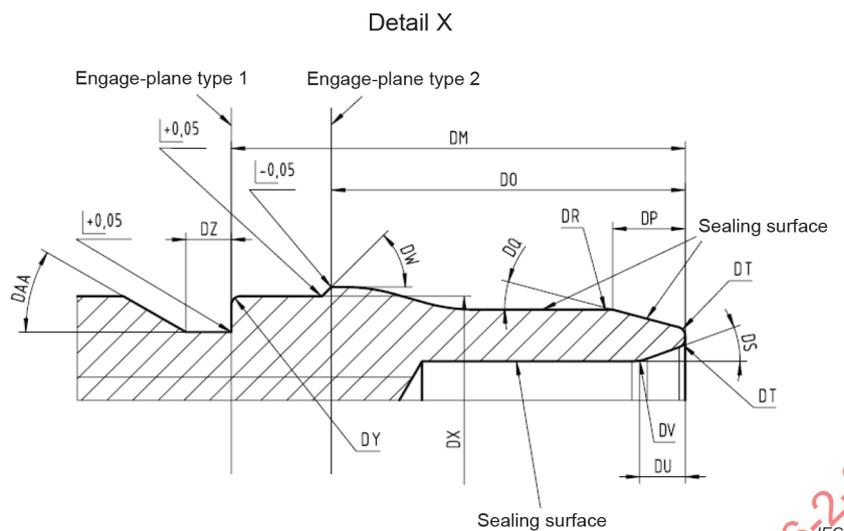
Outer push-pull locking: female fixed connector side view with details and engage-plane definition for male free cable connector
